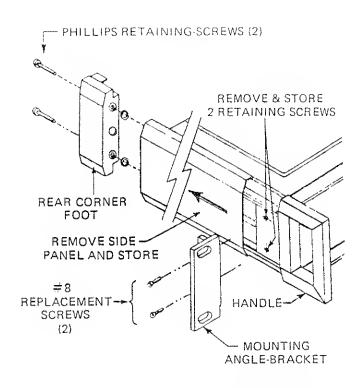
Fixed-Mount Angle-Bracket Detail
